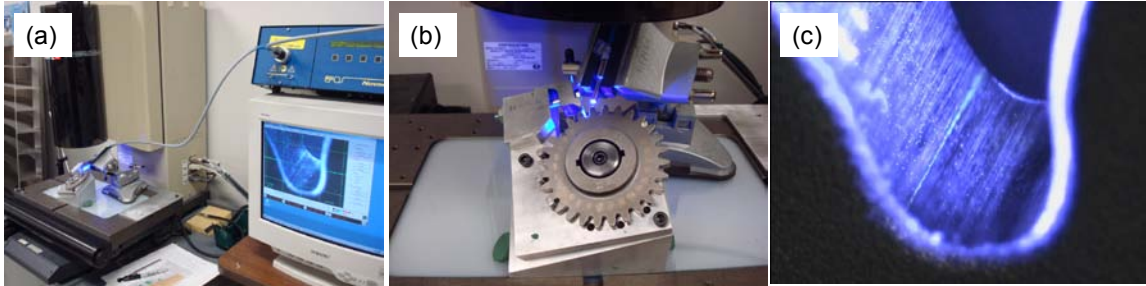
Non-destructive method for crack verification (a) Imaging system (b) Custom gear fixture (c) Imaged tooth
